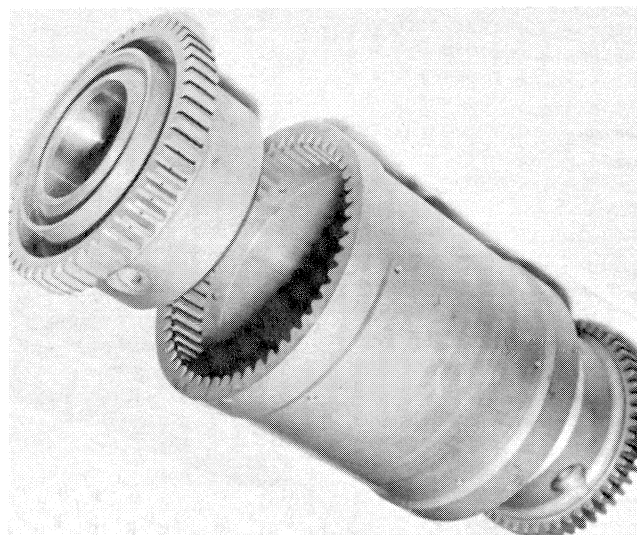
Gear-Type Coupling With Circulated Oil Lubrication.
